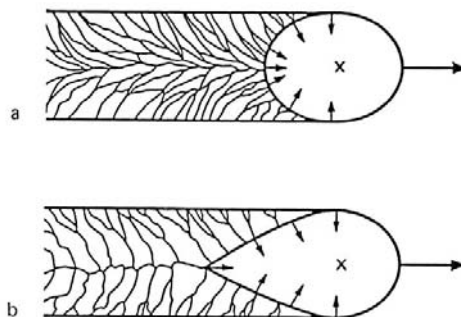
Top view of the primary structure, a) elliptical weld pool and b) tear-shaped weld pool.
